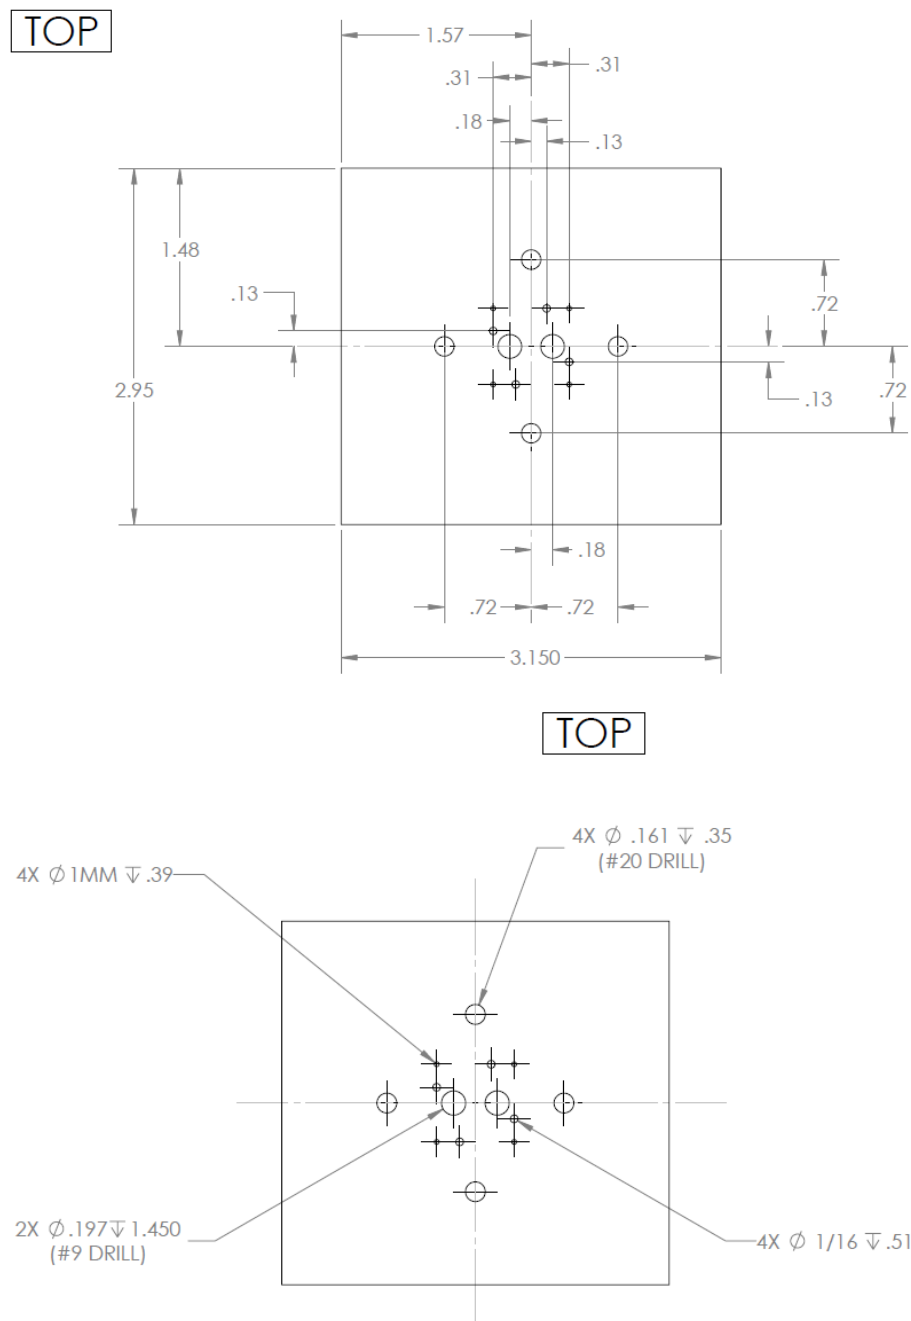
Technical drawings of the manifold base for the 9 × 9 test vehicle; all dimensions in inches unless otherwise specified.
